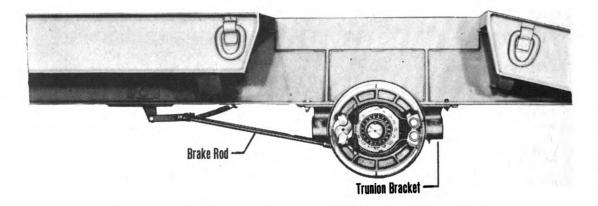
Rear Axle, with Outer Hub and Drum Removed
